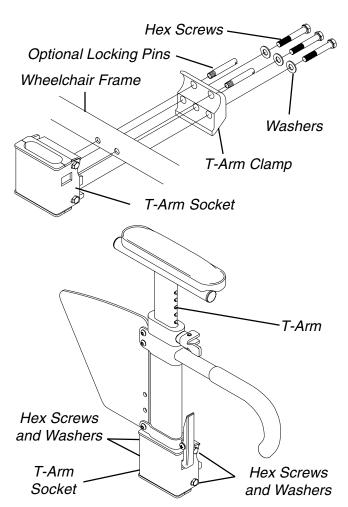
ADJUSTING T-ARM SOCKETS
